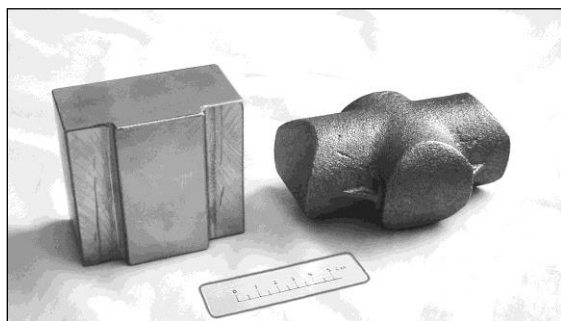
The Produced Part (Valve Sample) By Mechanical Press, 315 Tons
